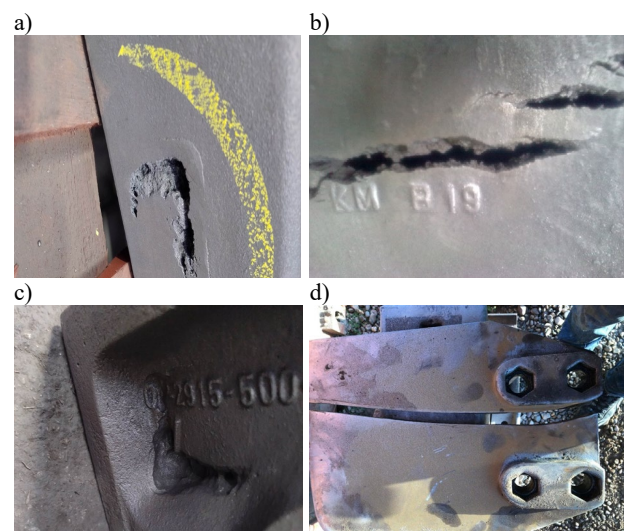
Examples of casting defects in HCCI cast iron: (a) porosity, (b) hot cracking, (c) shrinkage cavity, (d) impact fracture
